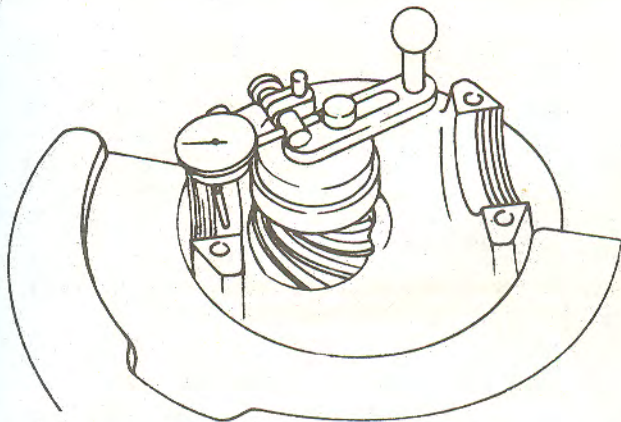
The dial gauge, the setting gauge and the gauge block (49 0305 555) in position in the differential carrier.
